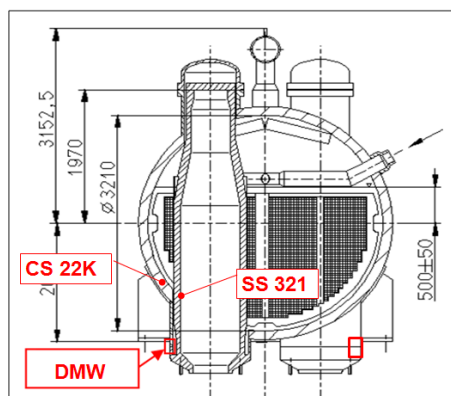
Simple drawing with cold and hot WWER 440 type SG collector DMW configuration
